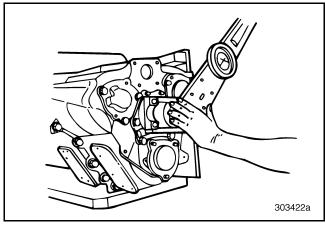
Tightening Clamp Plate Capscrew (T313LR/T318LR Shown)
